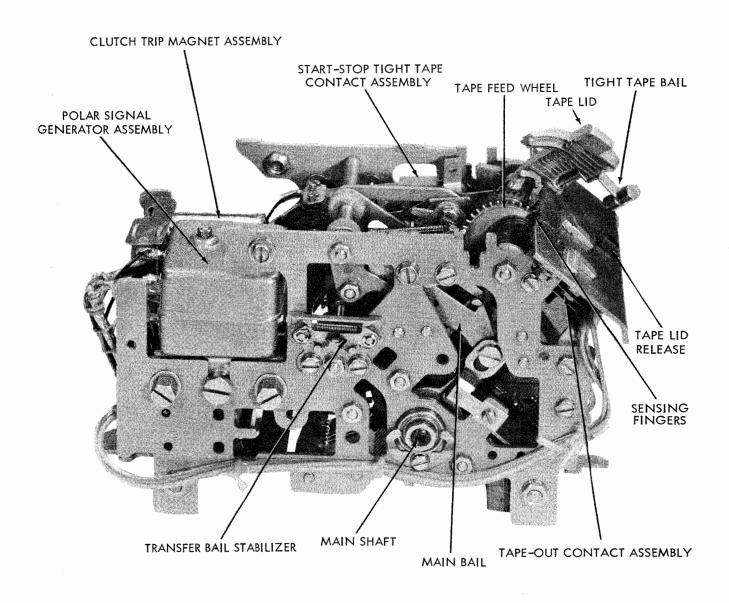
A. TRANSMITTER DISTRIBUTOR TT-311/UG (TOP PLATE AND COVER PLATE REMOVED)
